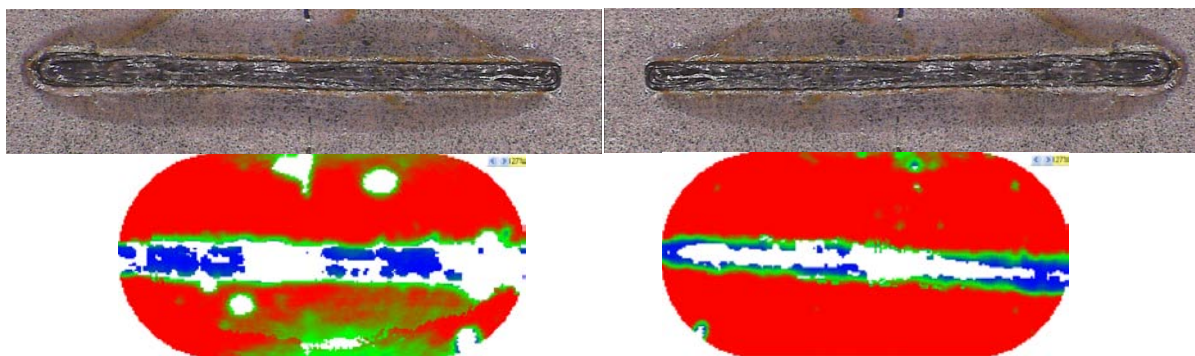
Weld top bead (0.1mm gap, sample C) and Amstech result from top bead (L) and bottom bead (R)
